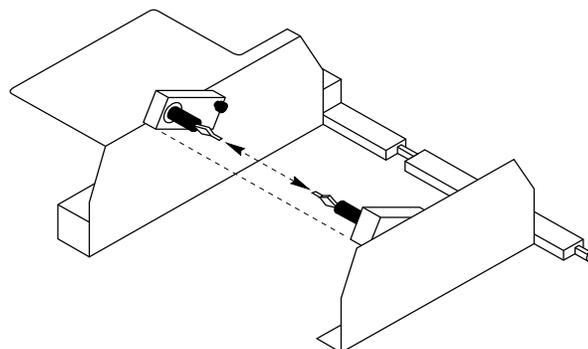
Adjusting the Swivel Arm on the Tailstock
